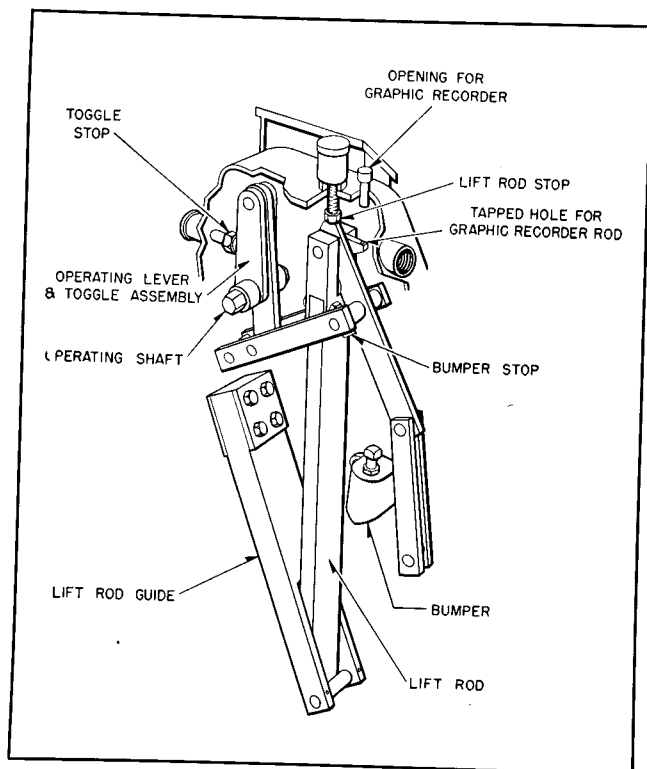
Pole Unit Lever Assembly of the 69-Kv Breaker
